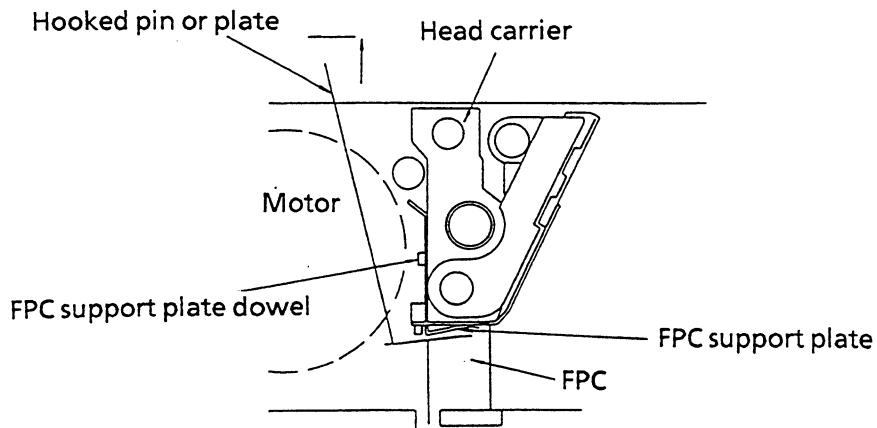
Removing the FPC Support Plate (Cross Section of Figure 7-1 AA')
